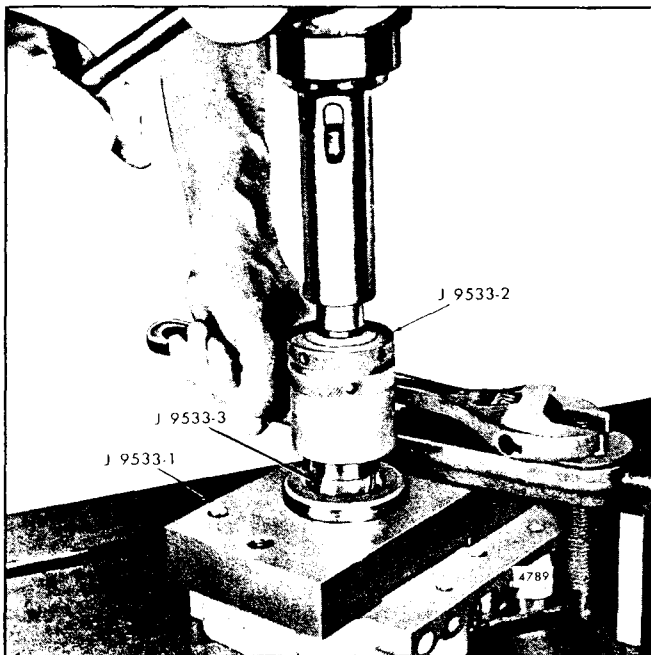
Positioning Cutting Tool in Fixture Guide
